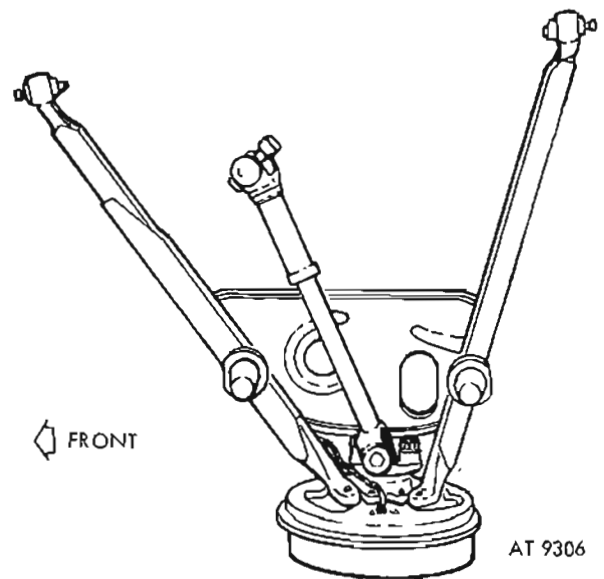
Rear Suspension Arm Assembly—Top View (M151, M151A1, M151A1C and M718 Vehicles).
